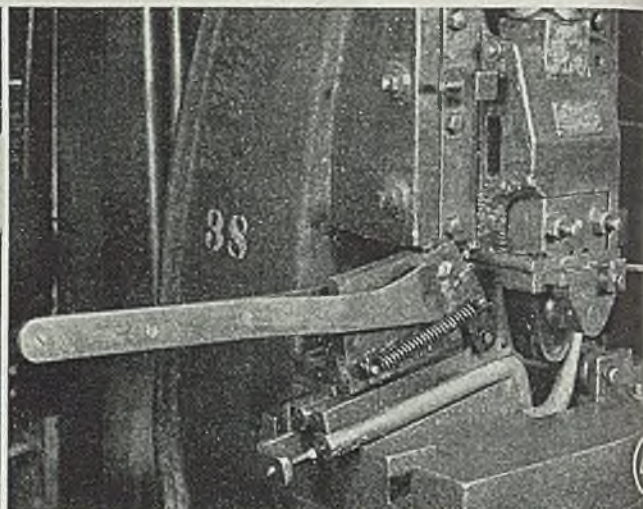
Closeup of two-step roller die, shown completing horn. Hand controls engagement and selection of dies
